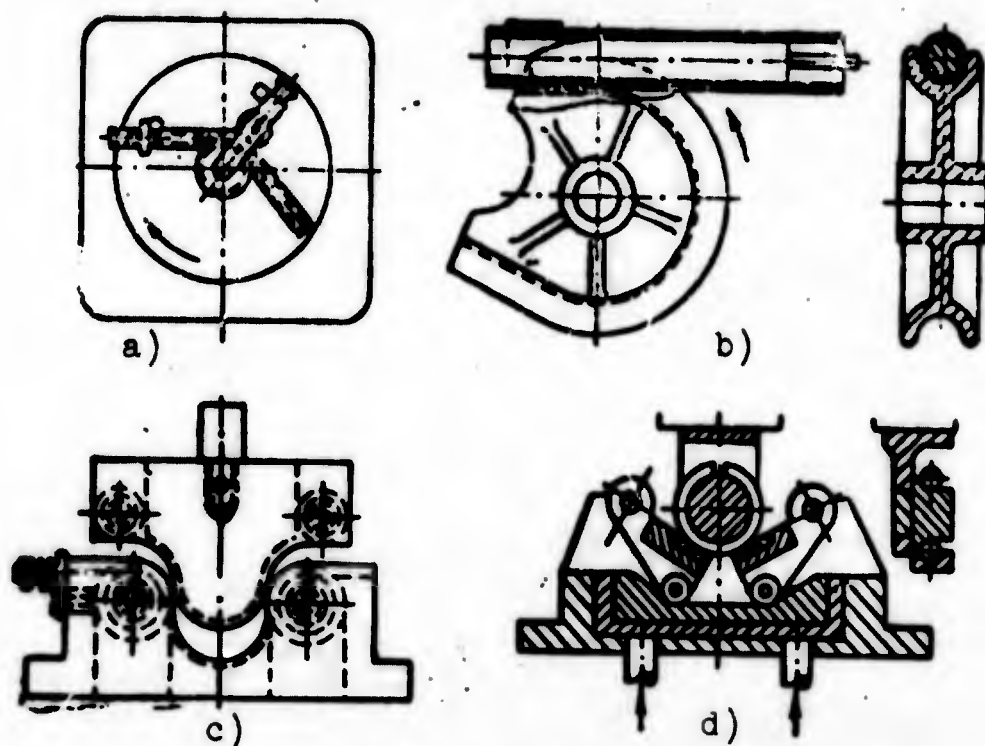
Methods of pipe bending. a) on bending devices between two rollers; b) on pipe-bending machines with stationary mandrel; c, d) in dies.
